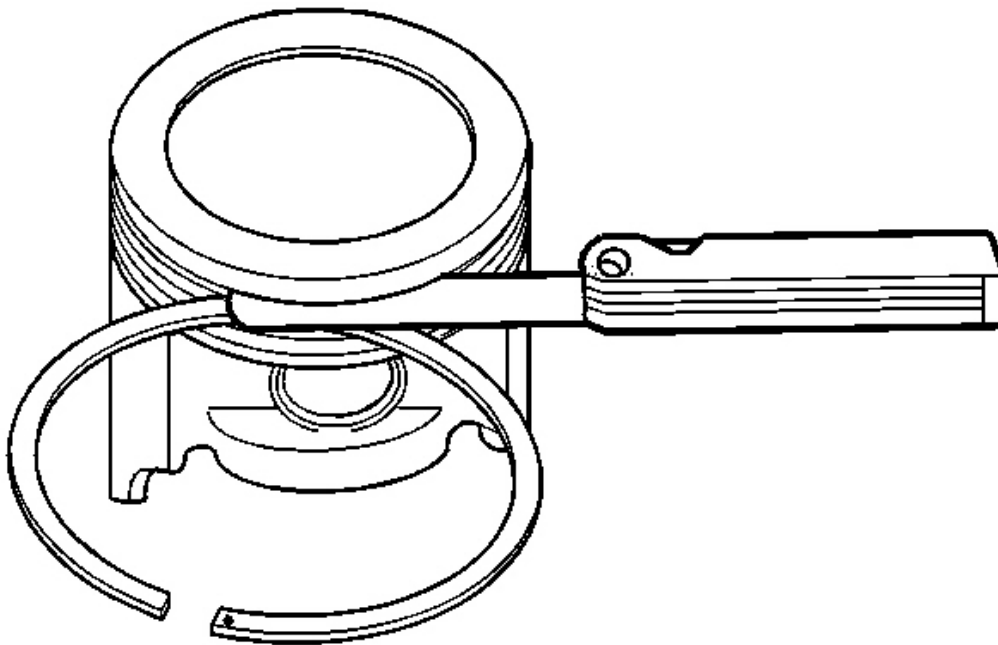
Measuring Piston Ring Side Clearance With Feeler Gauge
